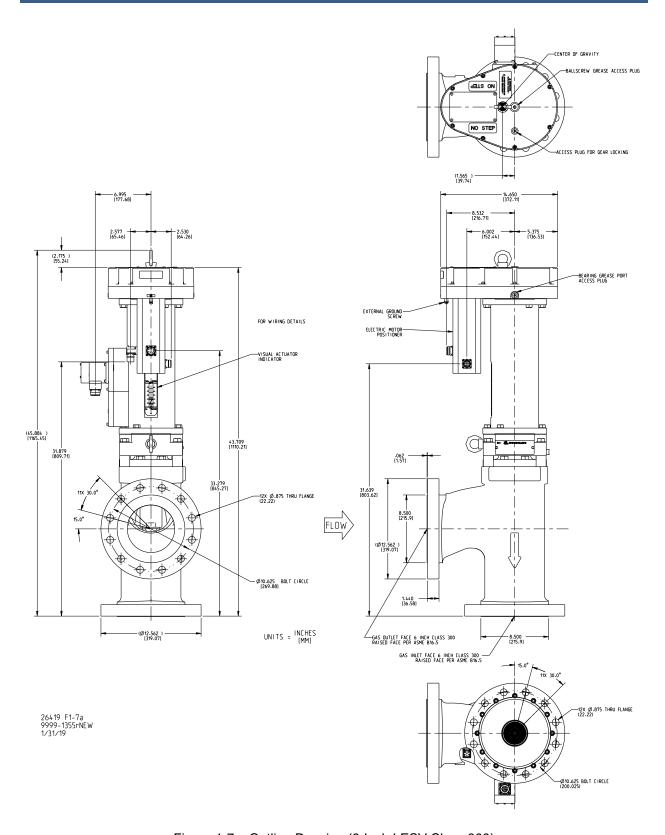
Outline Drawing (6-Inch LESV Class 300)
